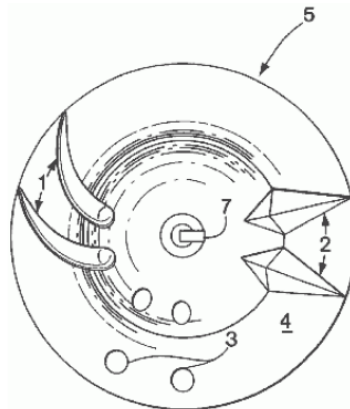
Bottom view of Cylinder head with grooves, channels and passages
